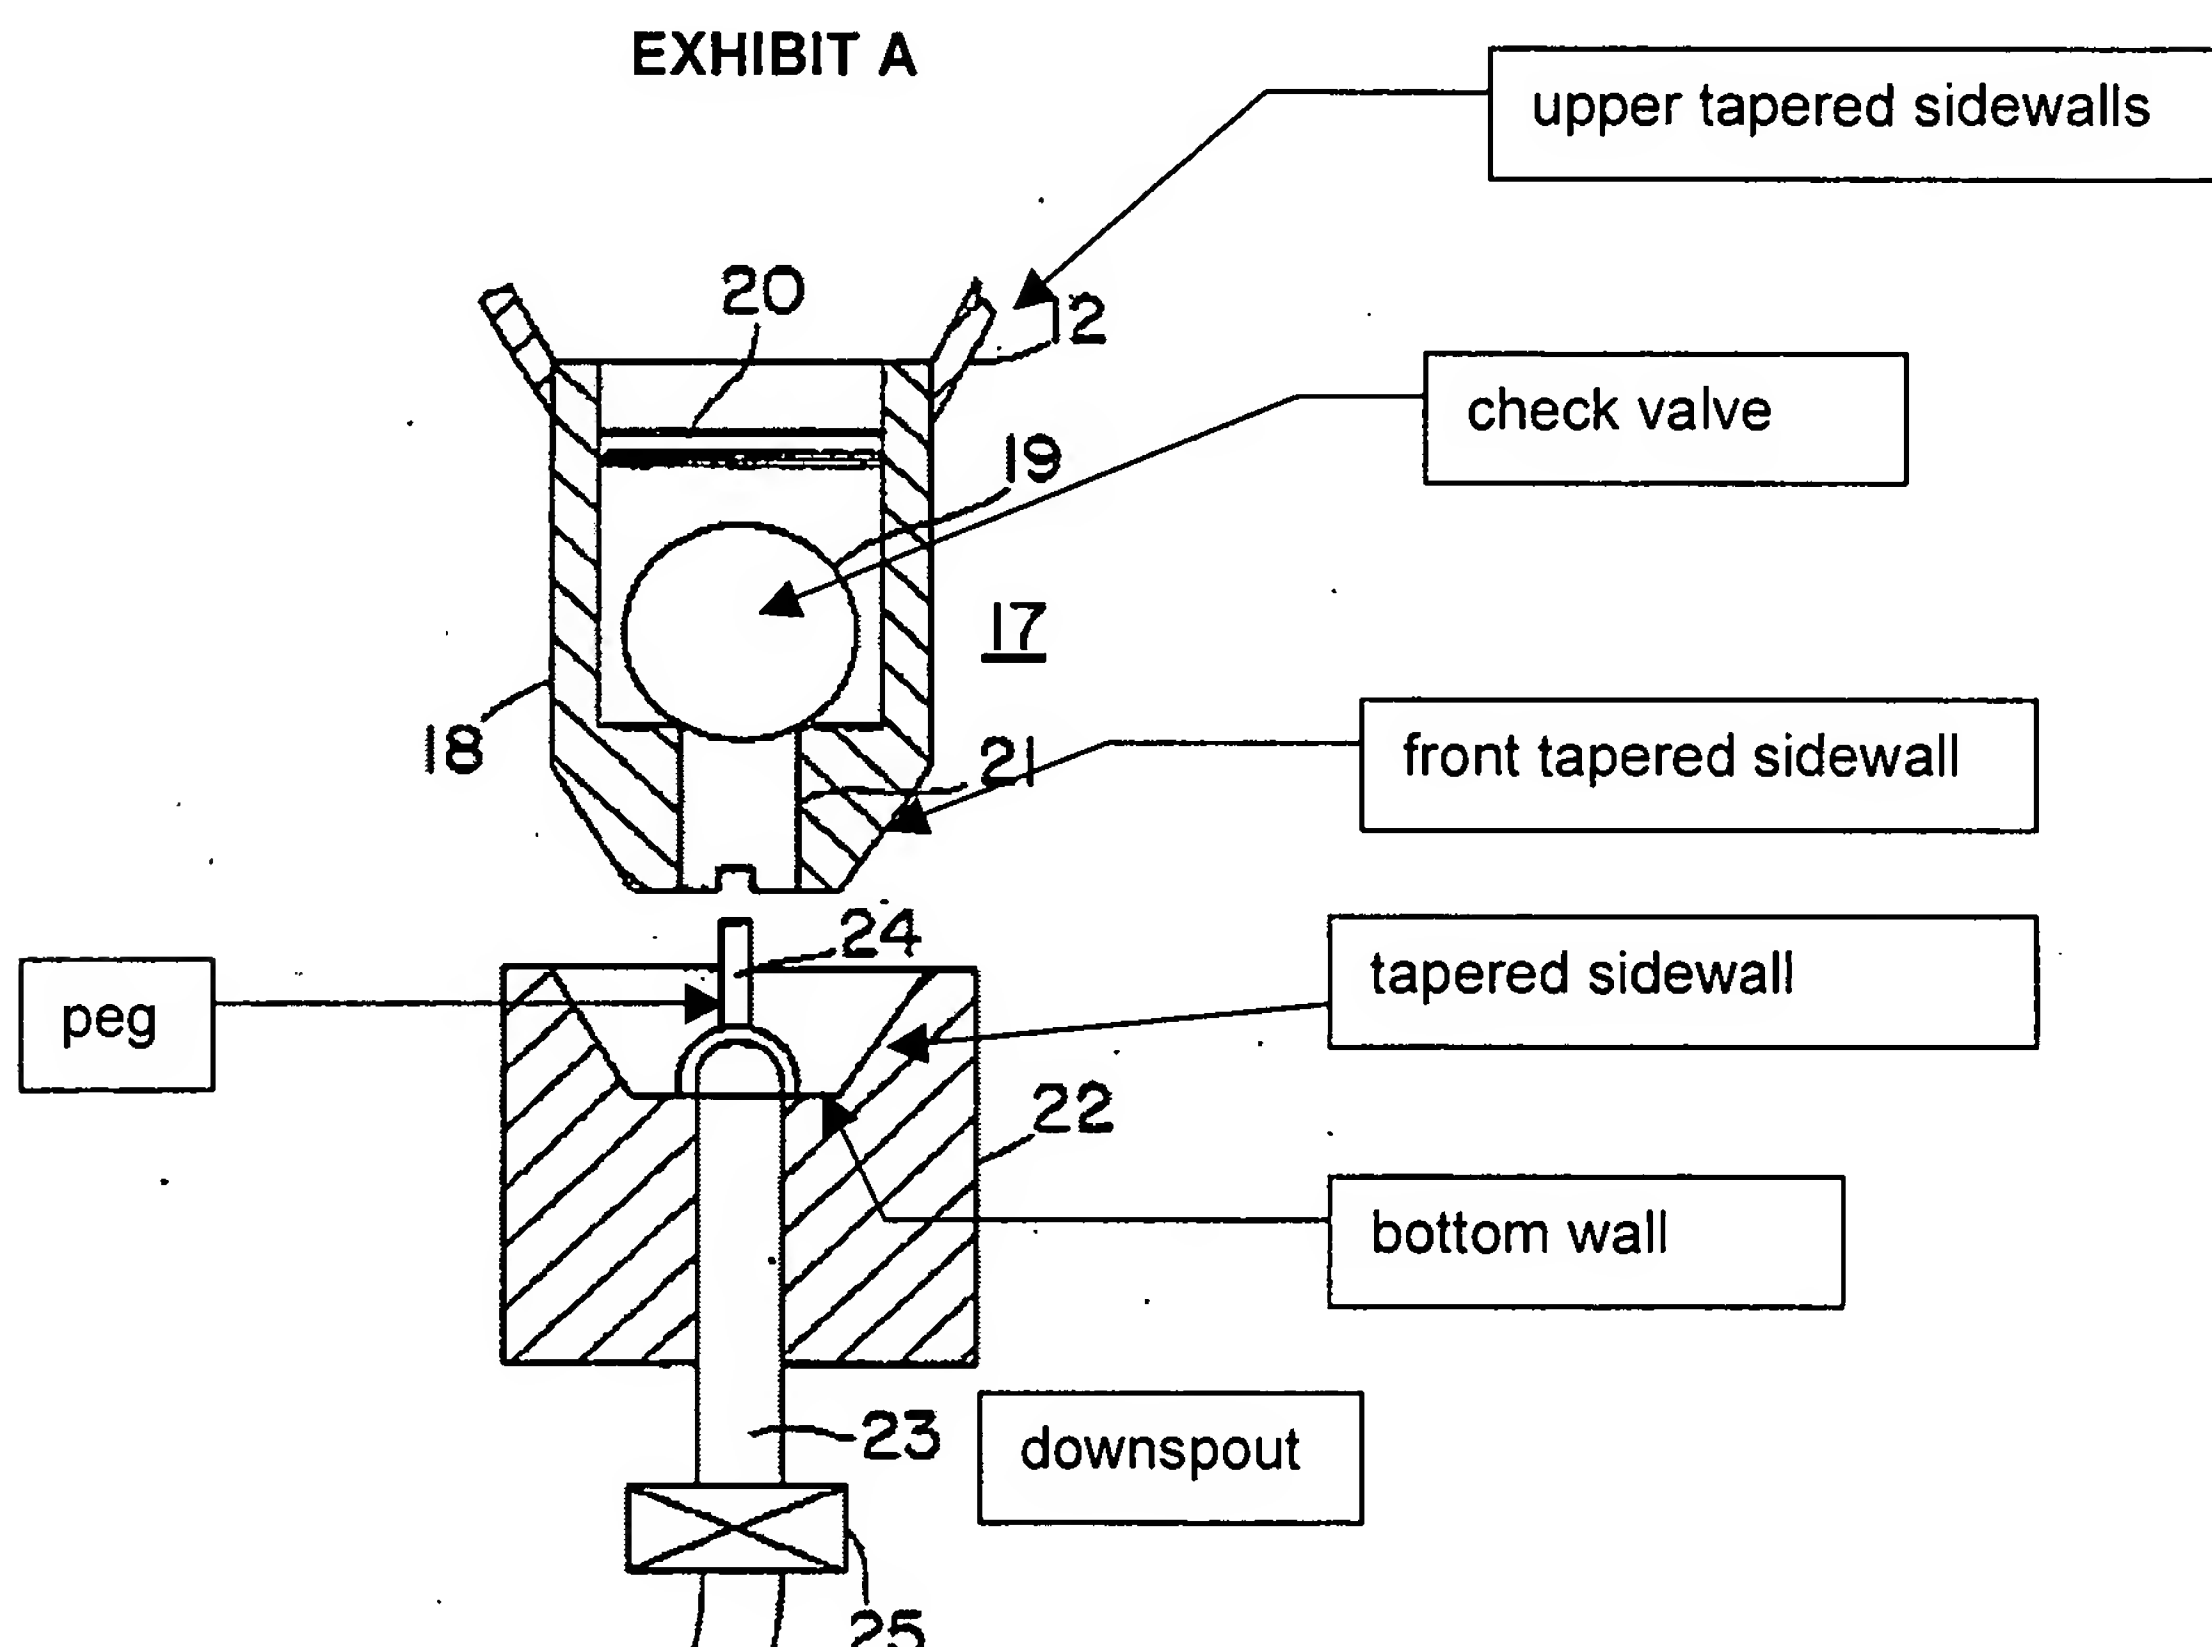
Exhibit A shows a bottom emptying device having a bottom wall and tapered side walls mounted about the periphery of the bottom wall wherein the bottom wall further having an aperture and a peg (24) mounted in upstanding relation to the bottom wall, and a downspout (23) depending from the bottom wall and being positioned substantially adjacent to the aperture. The downspout (23) has an inner bore or a lumen to allow the fluid flow from the downspout to the desired container. Hunkin et al. (4,590,810) does
